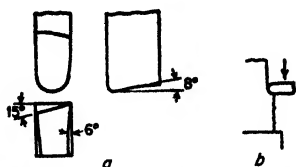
Tool No. 3. (a) Left-hand round-nosed roughing tool; (b) Application of the tool. (The G. A. Gray Company)
